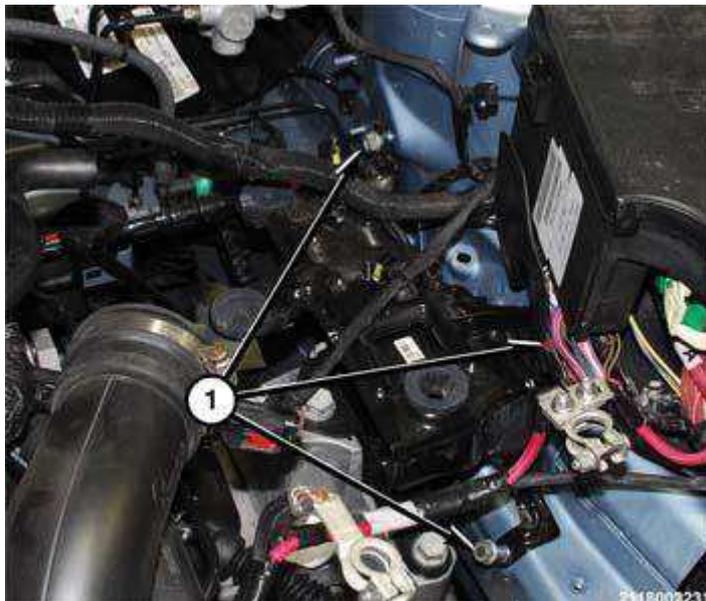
Air Cleaner Bracket Nuts & Bolts
